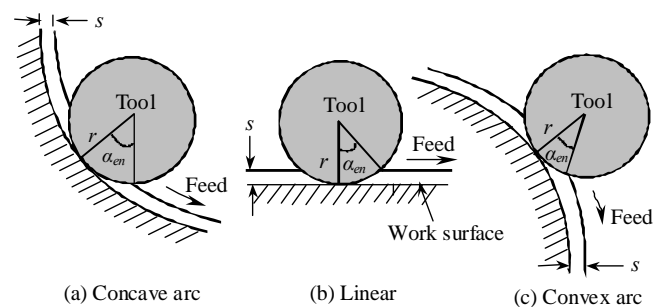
Variation in cutting engagement for different tool path geometries in 2D end milling. r : tool radius, α_{en} : engagement angle, s : step-over distance [128].
